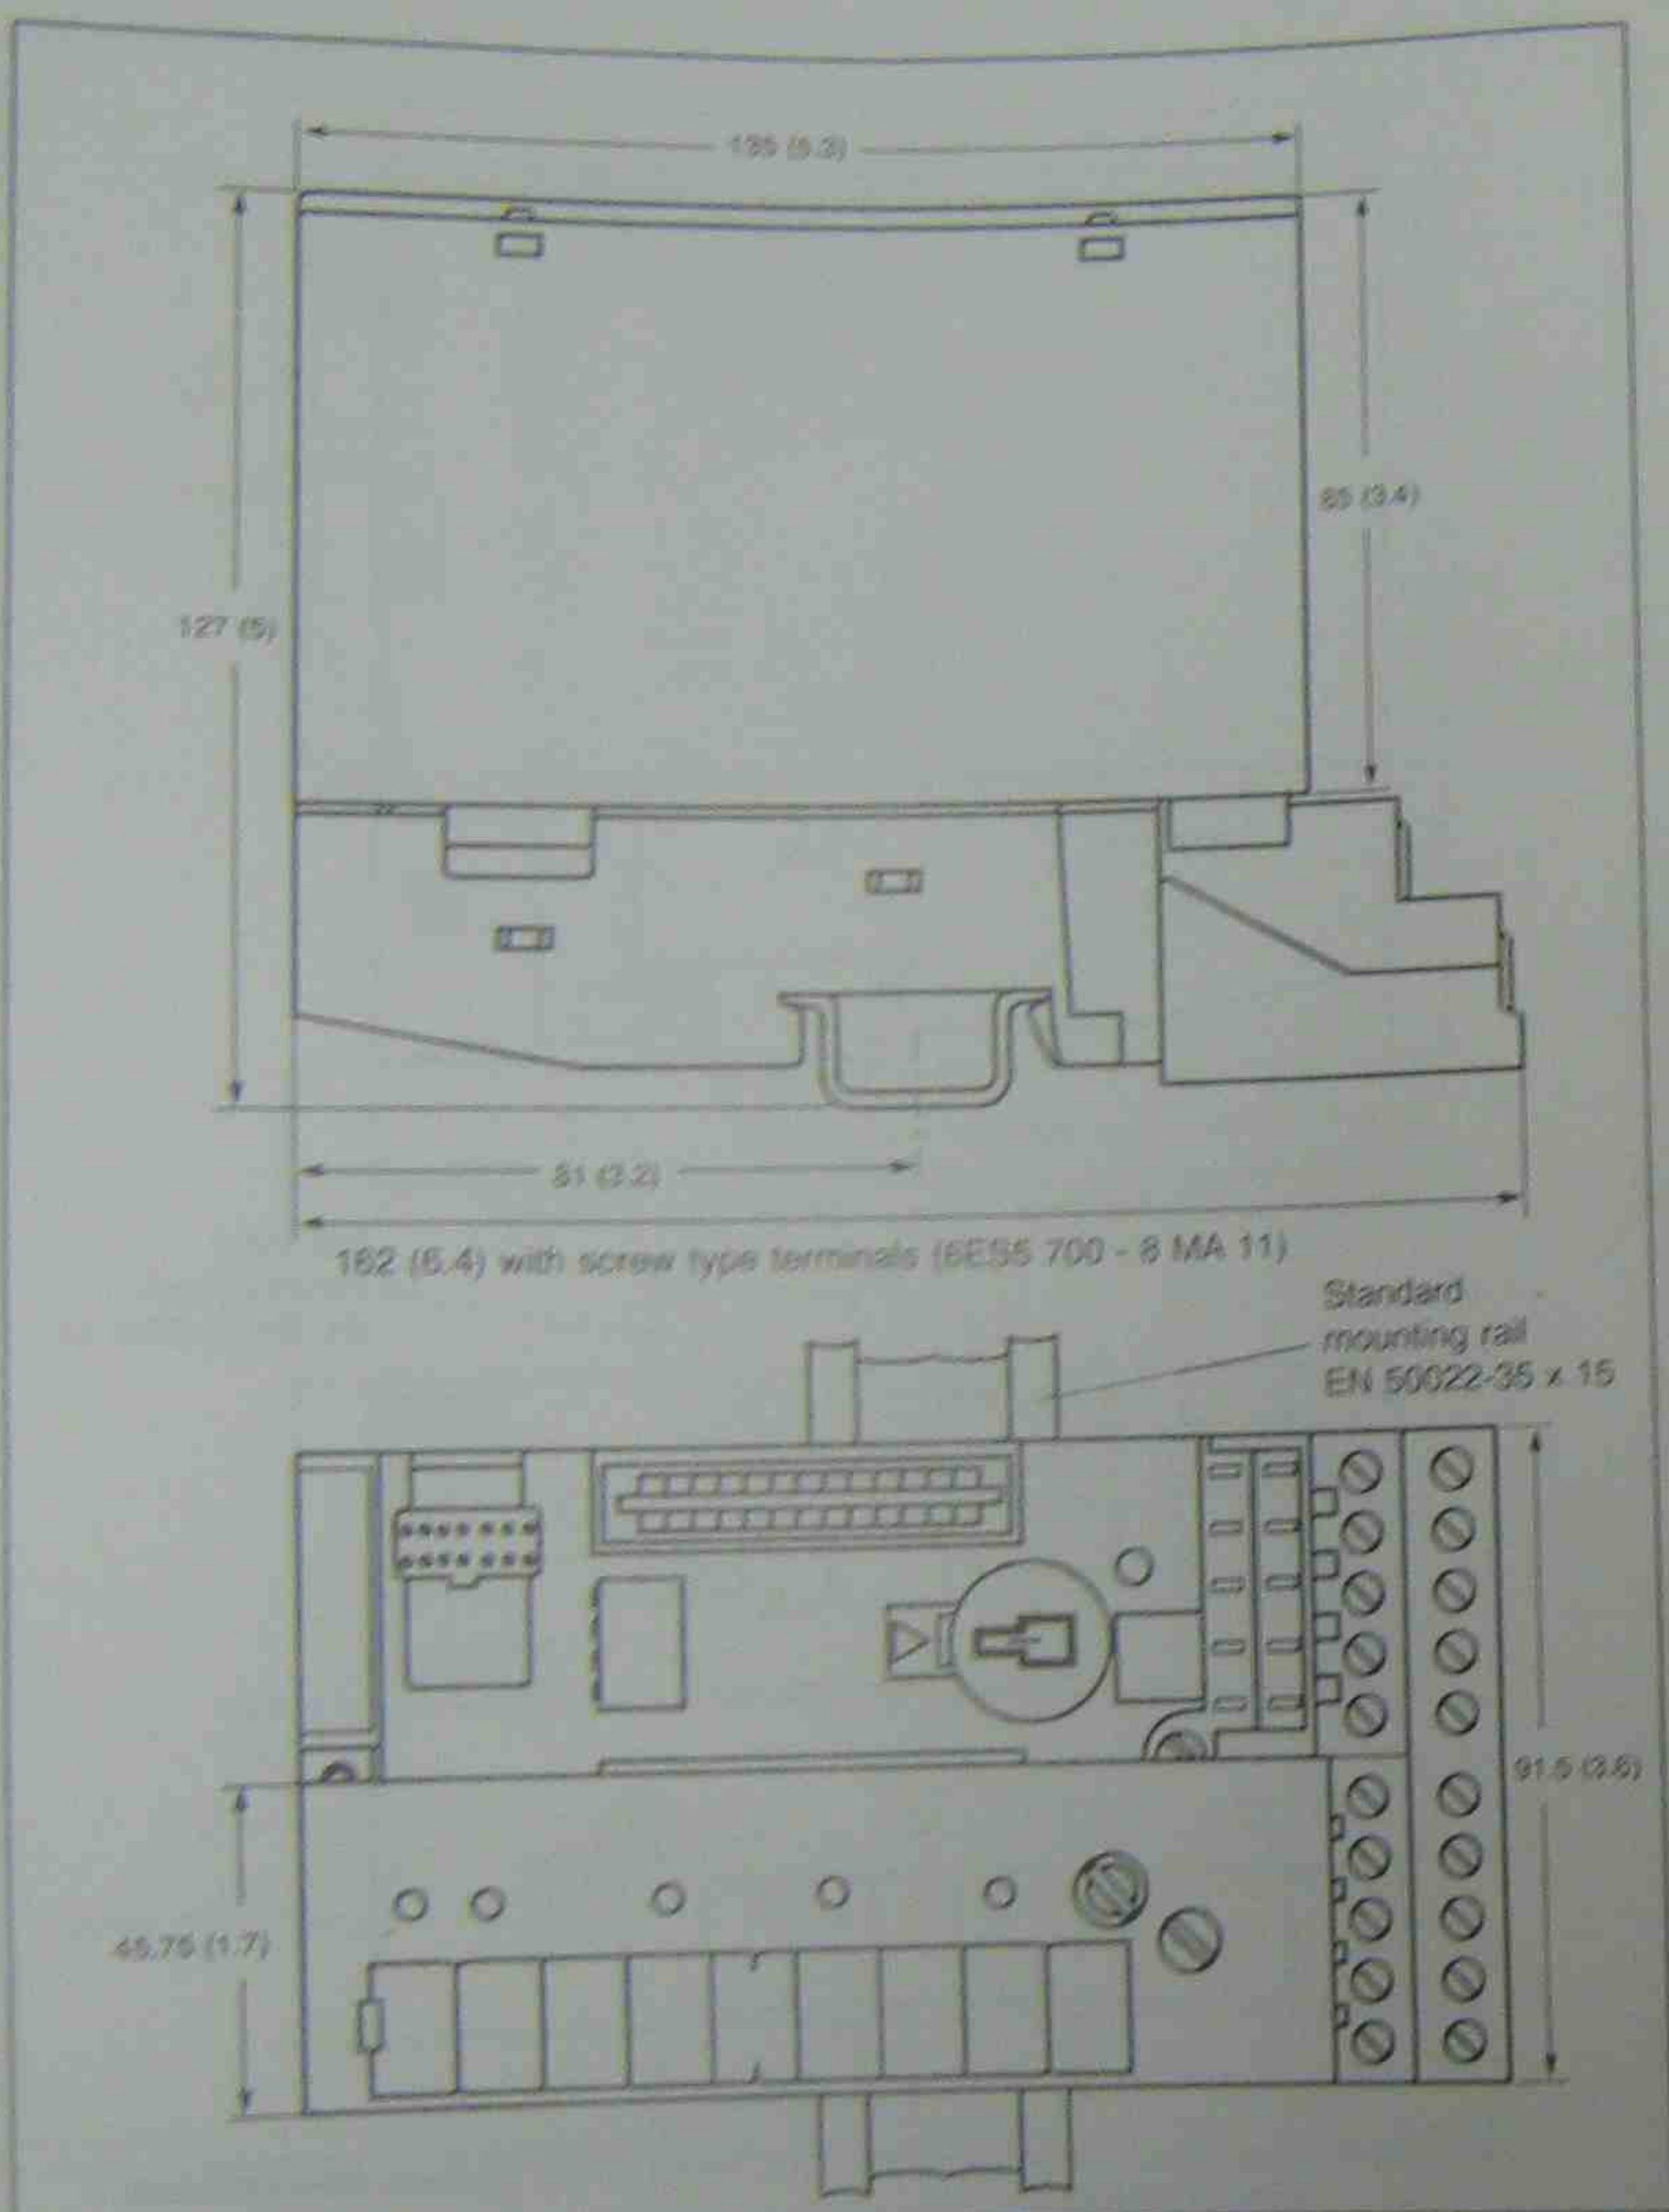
Dimension Drawing of the Bus Unit (SIGUT Screw-type Terminals) with I/O Module
